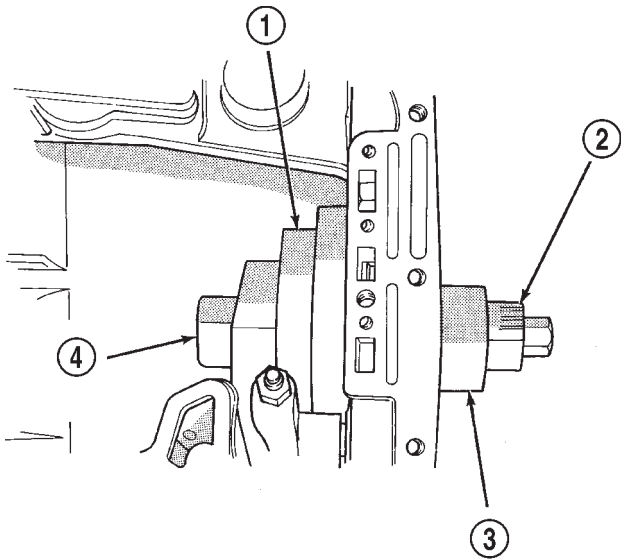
Positioning Puller Plate On Clutch Cam
